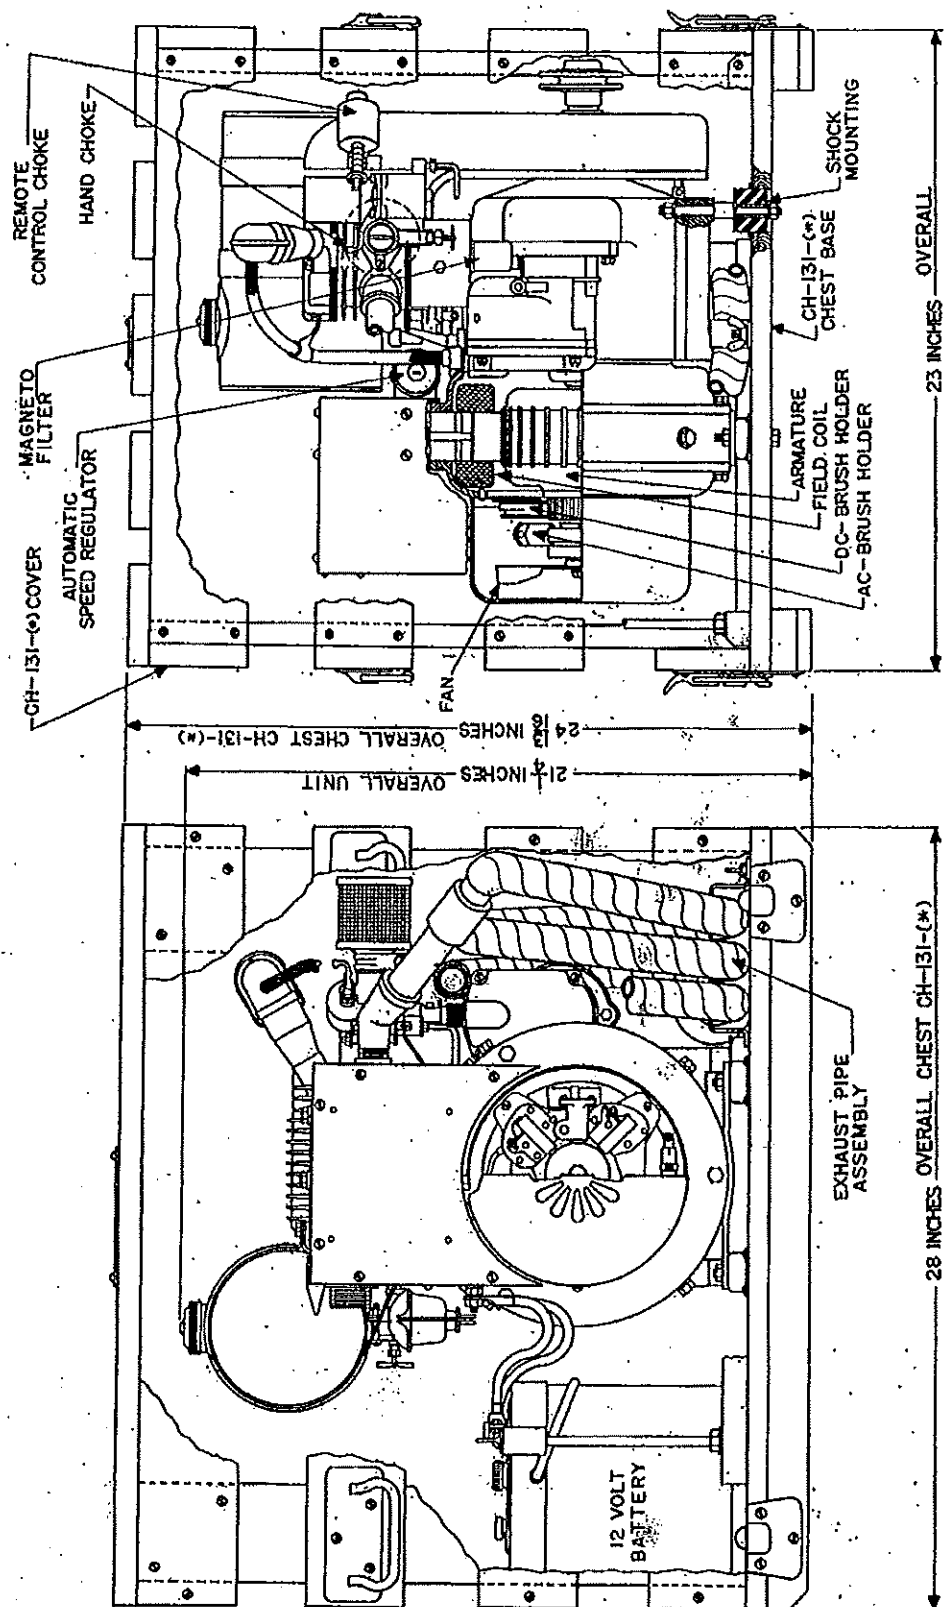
Power Unit PE-108(*) Dimensional Sketch.
